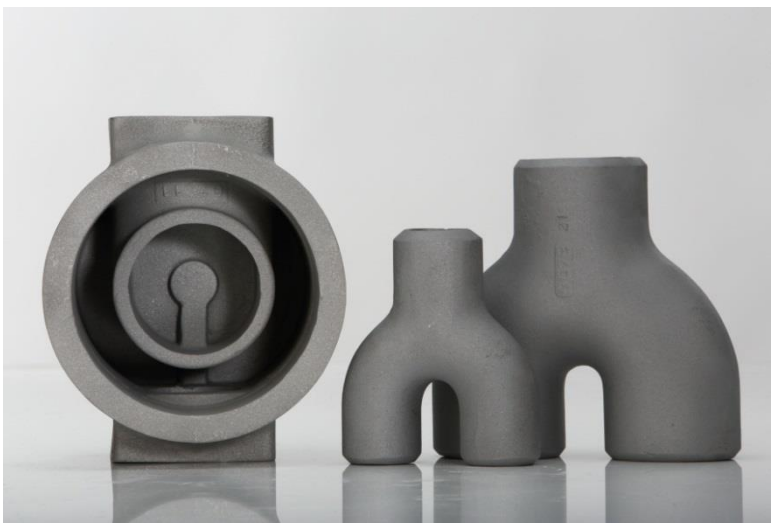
Parts produced by the Shaw Process. Courtesy of Bonds Precision Castings.
